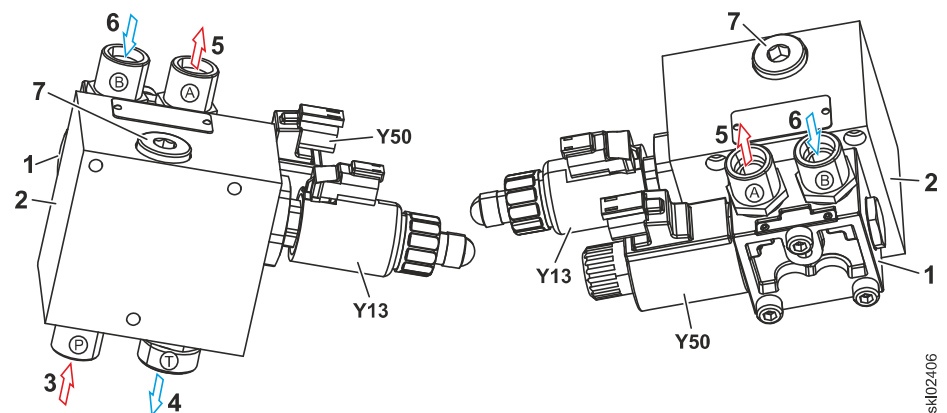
Valve block for fan reversal (from front left and from rear right)
